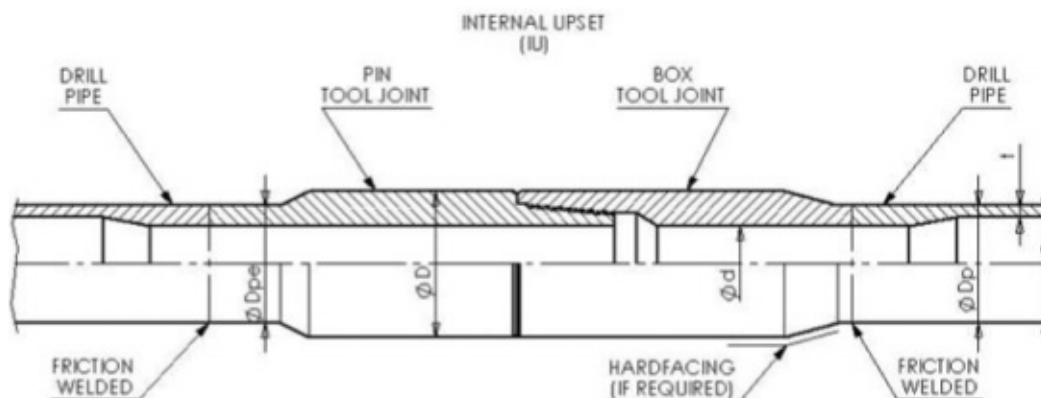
Drill Pipe with Weld-On Tool Joint Assembly⁷
